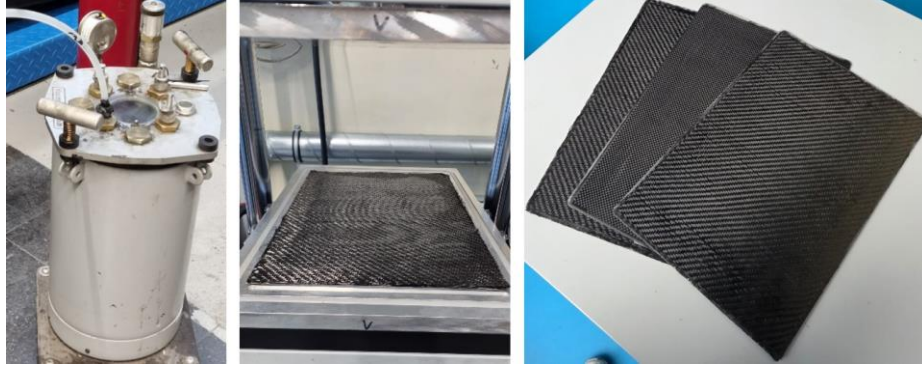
Vacuum chamber (left), heated press with mold (middle), CFRPs (twill and plain) (right)
